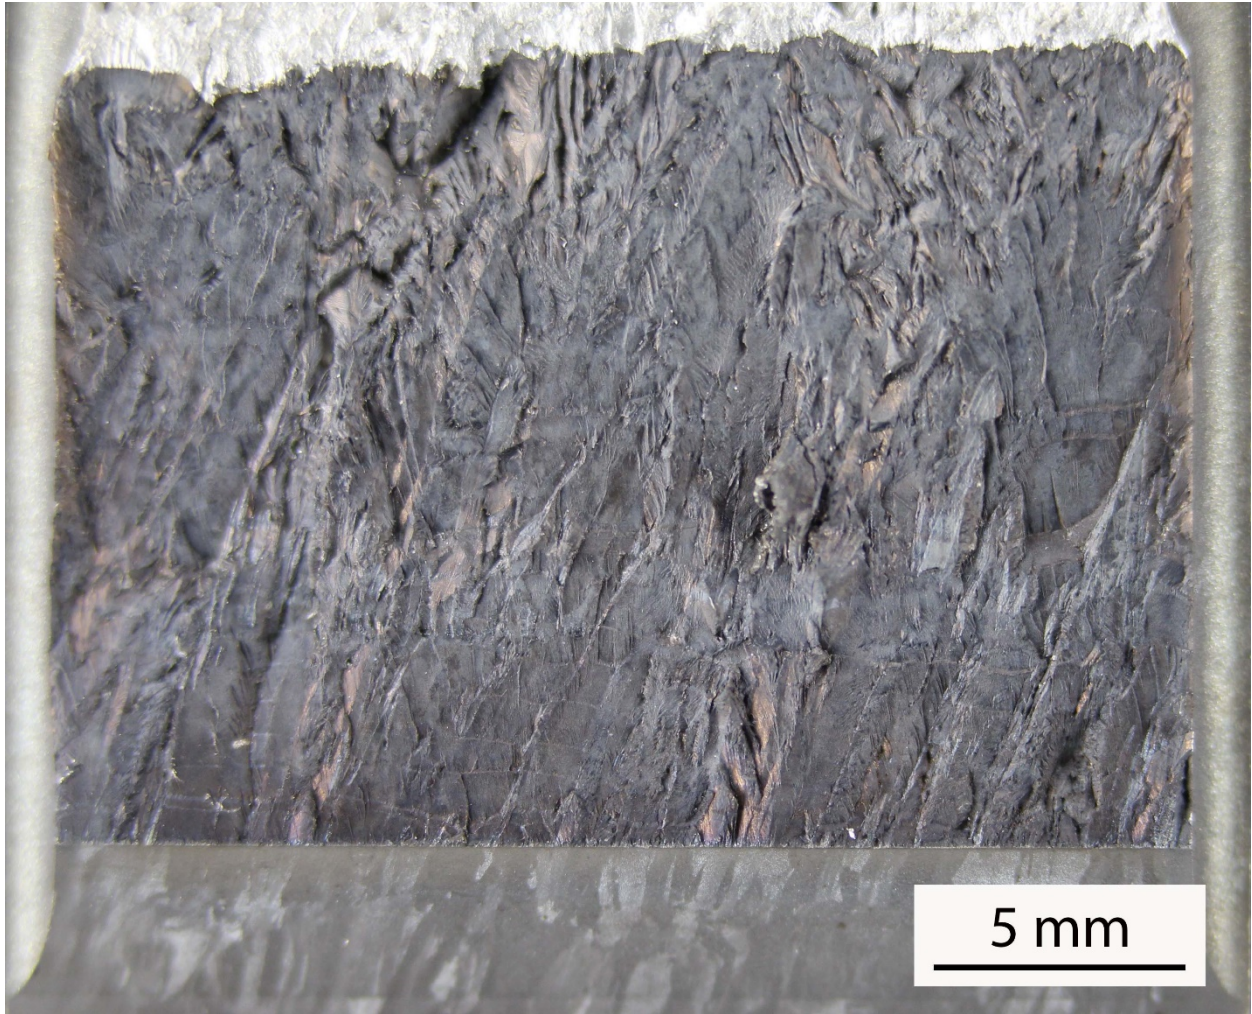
Fracture surface of specimen HHEP52M-TS-1. Crack advance is from bottom to top.
